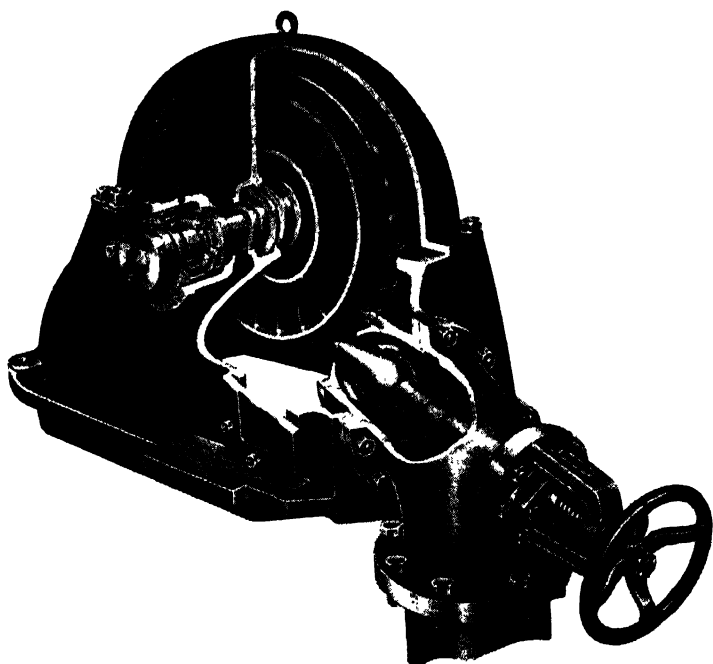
SECTIONAL VIEW OF A TYPICAL TURGO IMPULSE WHEEL
